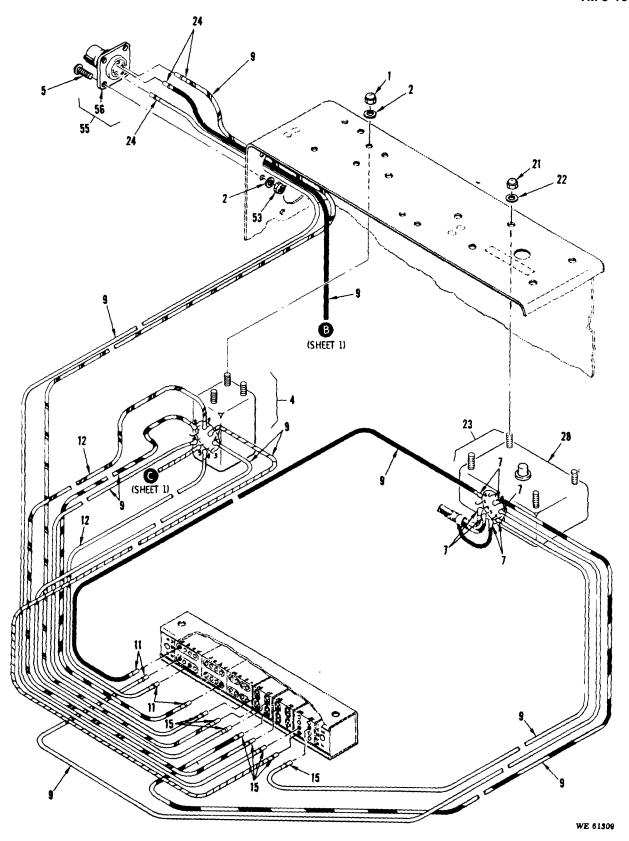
(2). Control box subassembly—partial exploded view (sheet 2 of 3).
